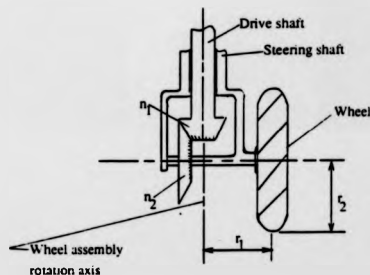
Illustration of design of the wheel-offset from the wheel assembly vertical axis (Type-1).
